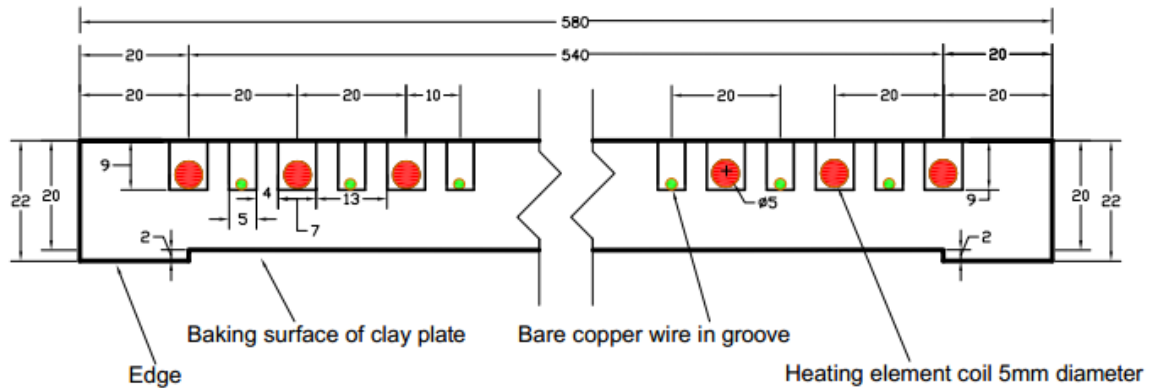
Section view of the clay plate of 58 cm diameter with heating element placed, conceptual copper wire embedding in grooves and sealed. (NTS).
